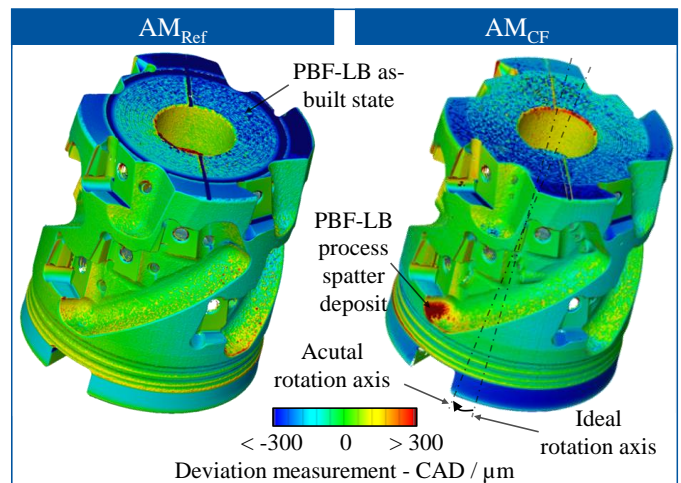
Geometrical accuracy of AM tools measured by optical 3D scan
